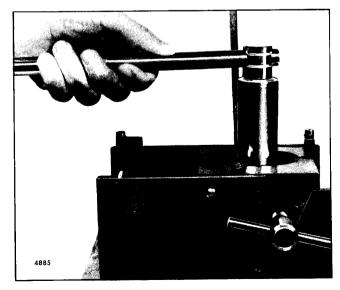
Removing Injector Nut using Tool J 4983-01
